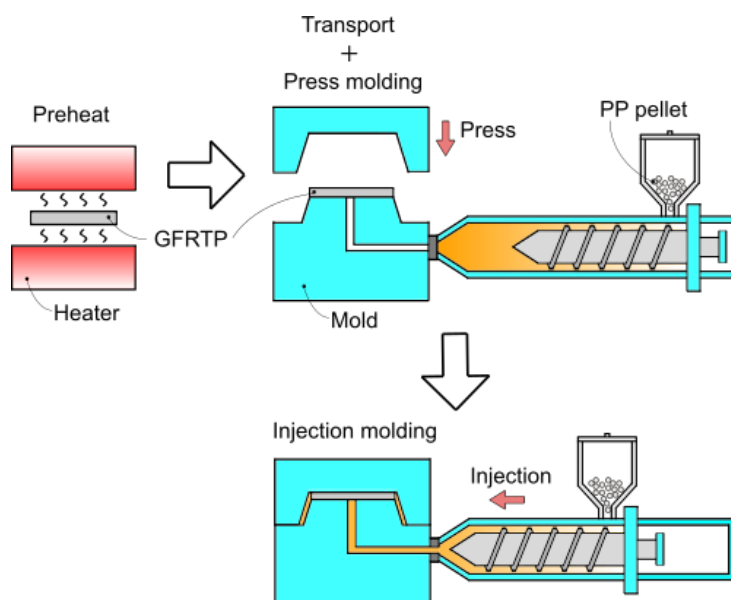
Schematic drawing of press and injection hybrid molding.
